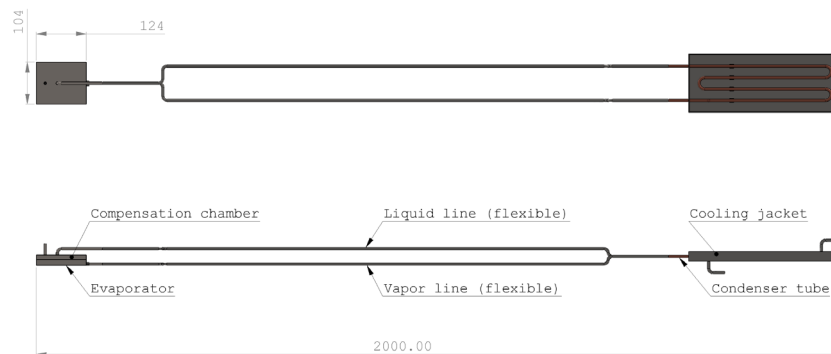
Exterior view and dimensions of the flat-evaporator flexible loop heat pipe (FEFLHP). Dimensions are in millimeters.
